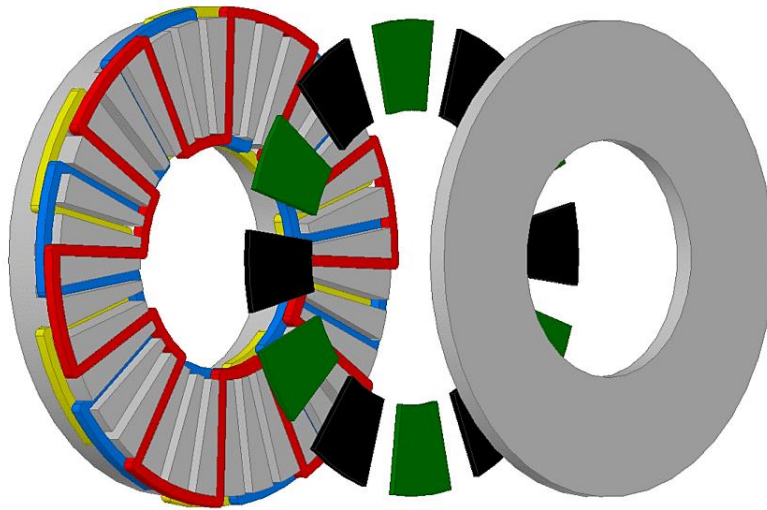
Exploded view of the 3-D model of the motor with 36 stator slots and 12 rotor poles[16]
